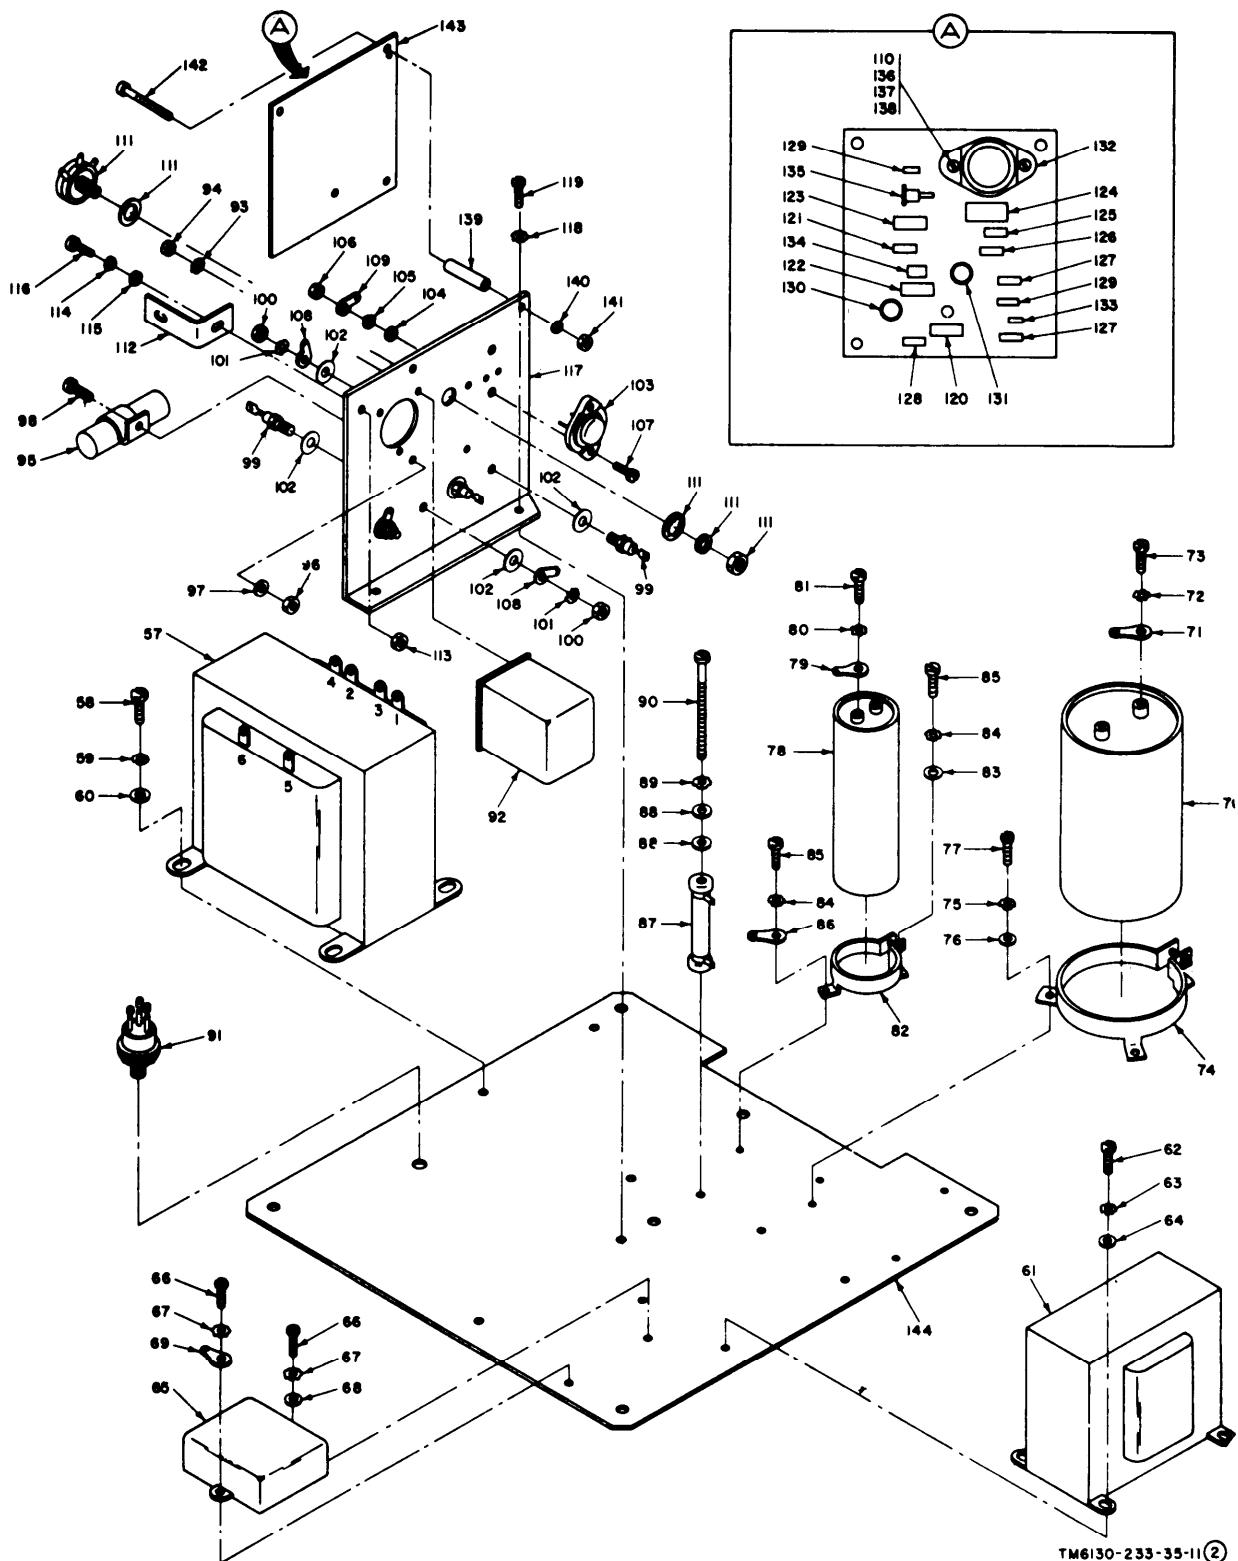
(2). Power Supply PP-2953/U, exploded view (part 2 of 2).
